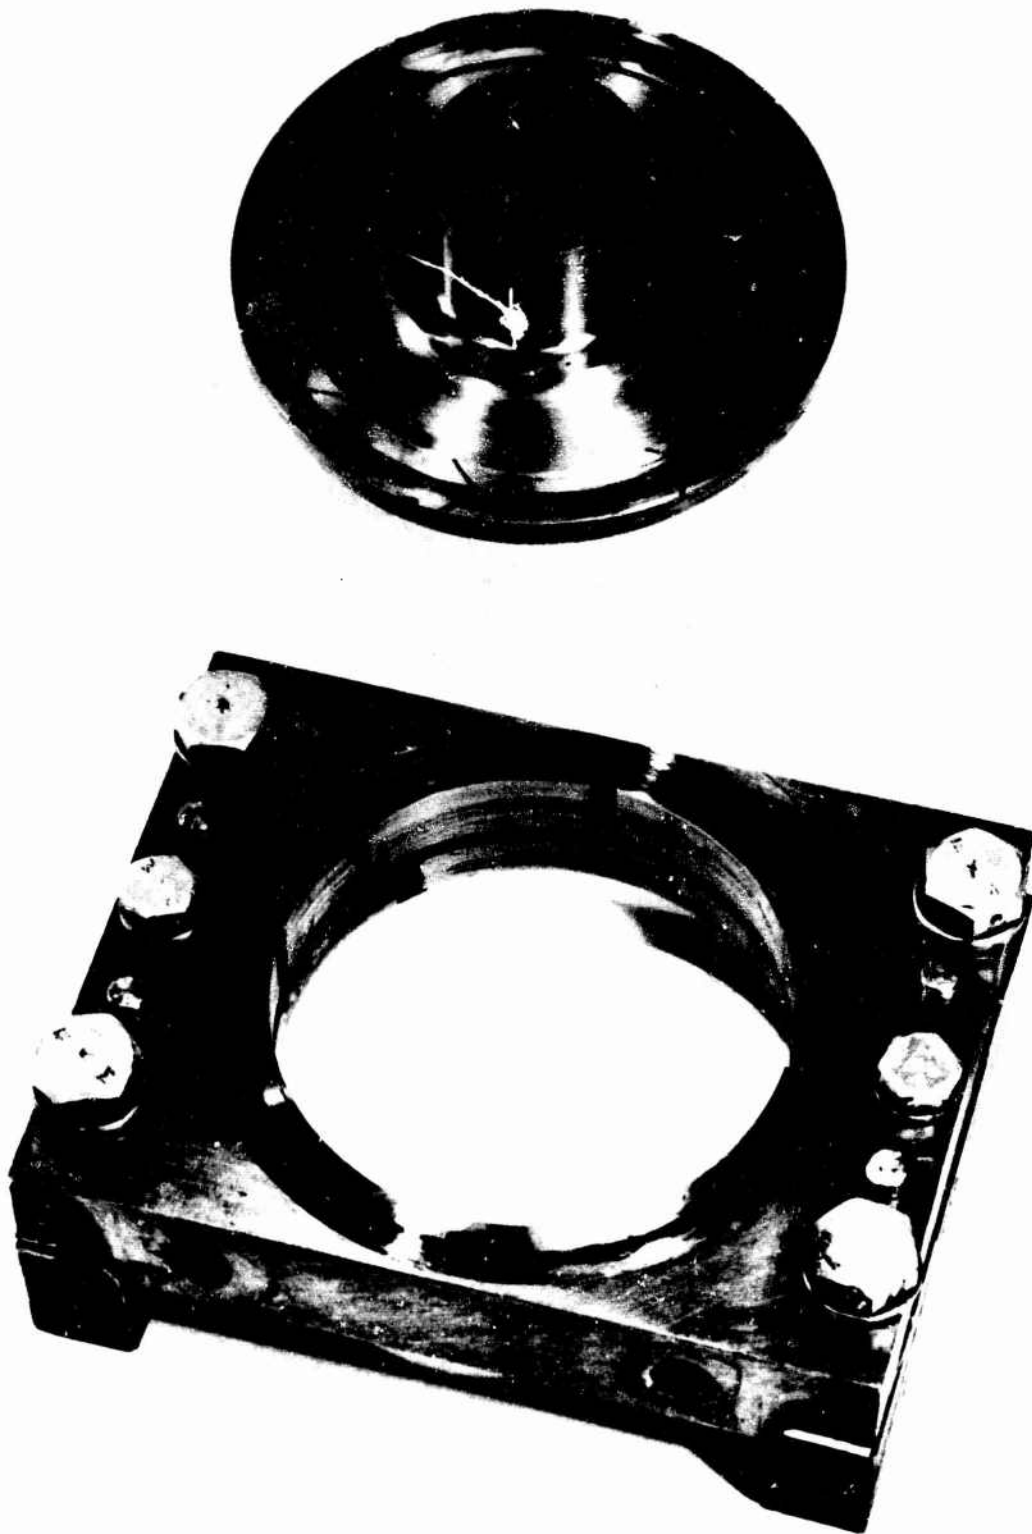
Hub Gimbal System Thrust Bearing After Completion of Test.
